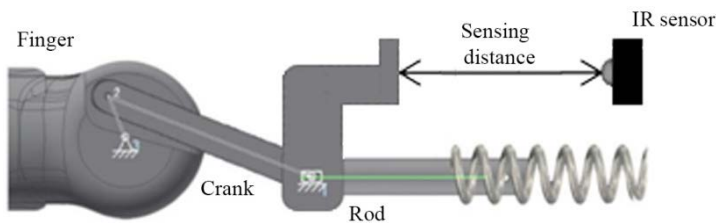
Lateral view of the knuckle rod-crank mechanism.
